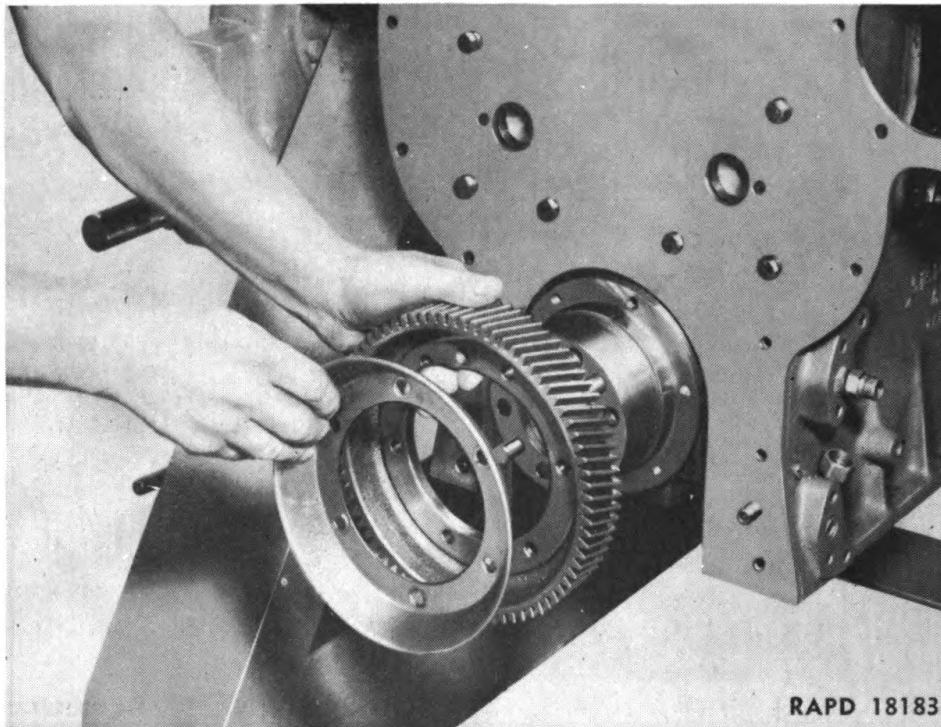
Crankshaft Gear and Oil Slinger Installation
